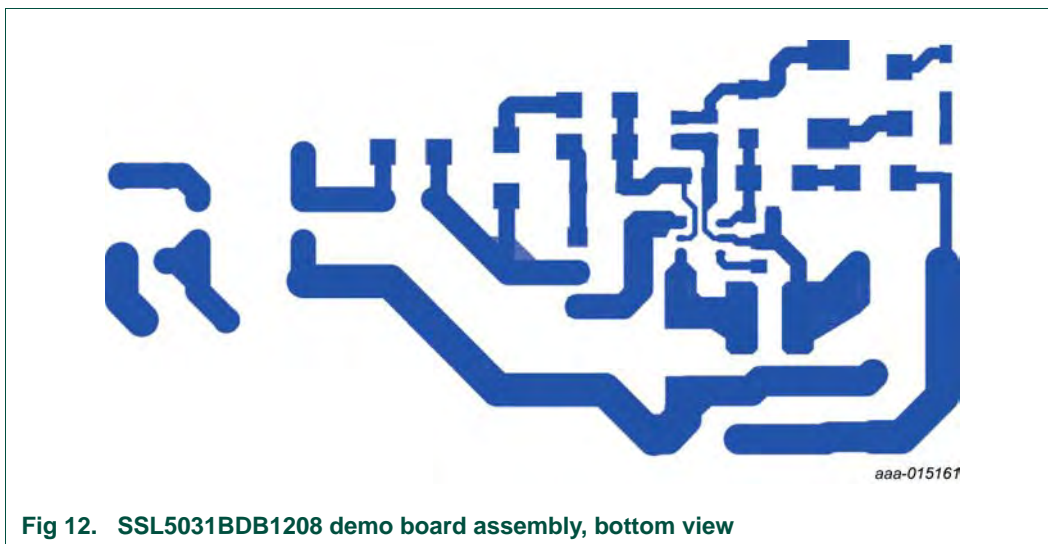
SSL5031BDB1208 demo board assembly, bottom view
